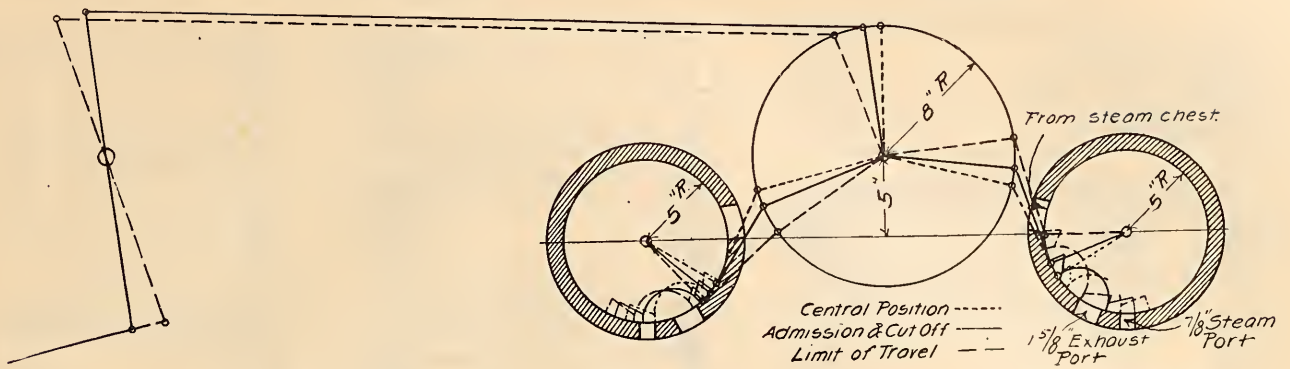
VALVE MOTION DIAGRAM—YOUNG ROTARY VALVE GEAR FOR LOCOMOTIVES.
